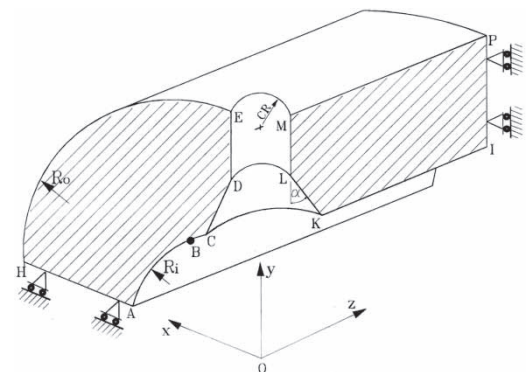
Main dimensions of chamfered cross-bored cylinder
